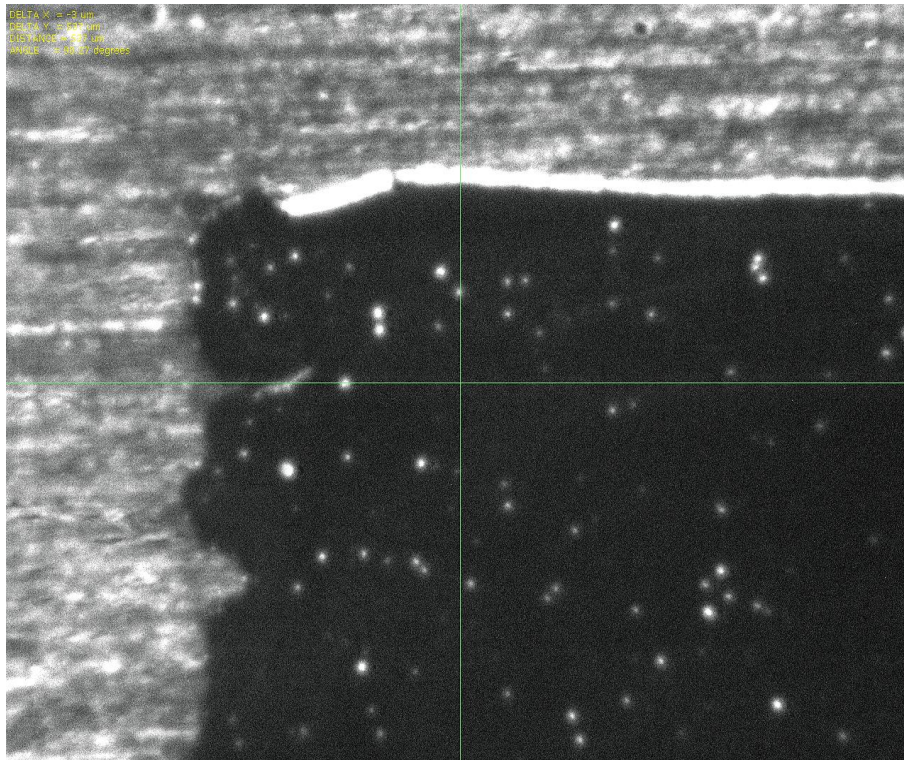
Printed RTD sensor pad, used for further cable connection
